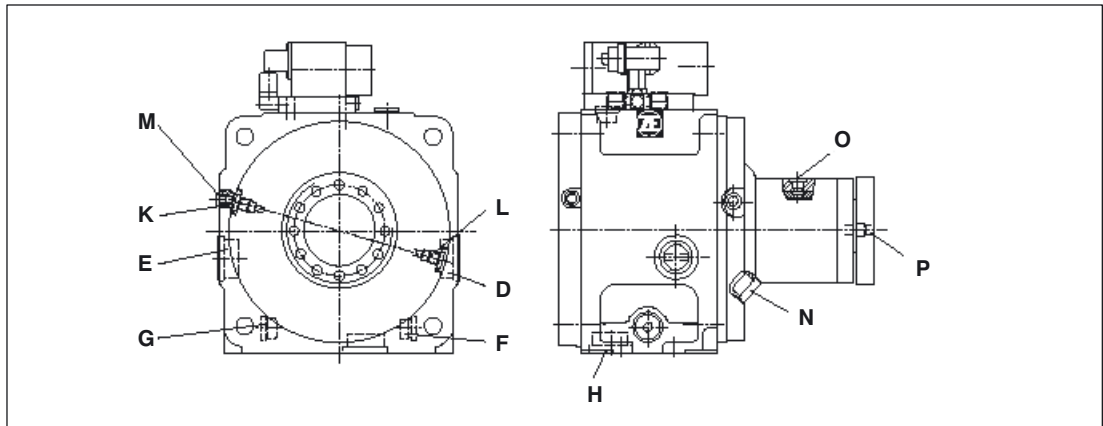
Selector gearbox with selector unit for frame sizes 132 and 160
